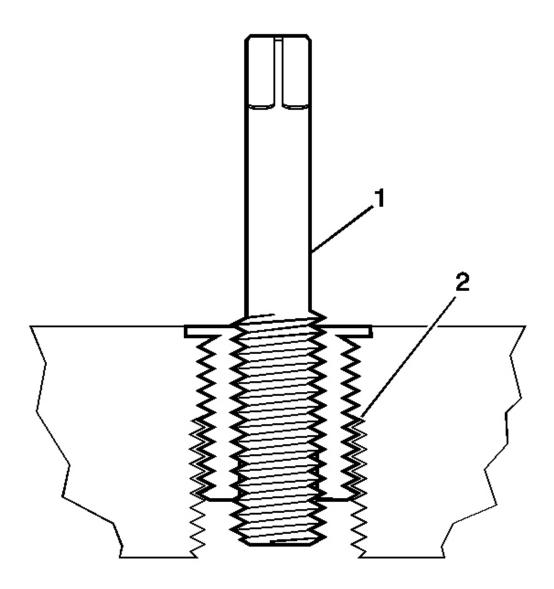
View Insert And Tool - Standard Thread Courtesy of GENERAL MOTORS CORP.
